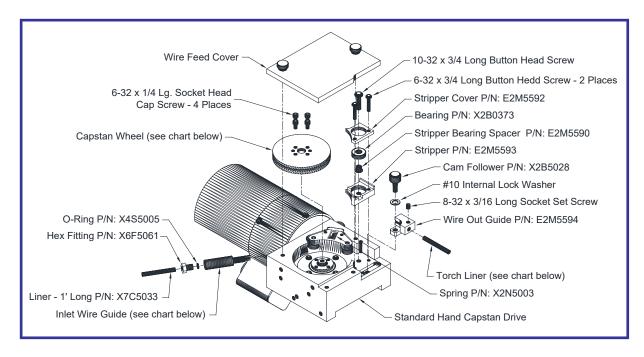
Steel Alloy Standard Hand Wire Drive Configuration
